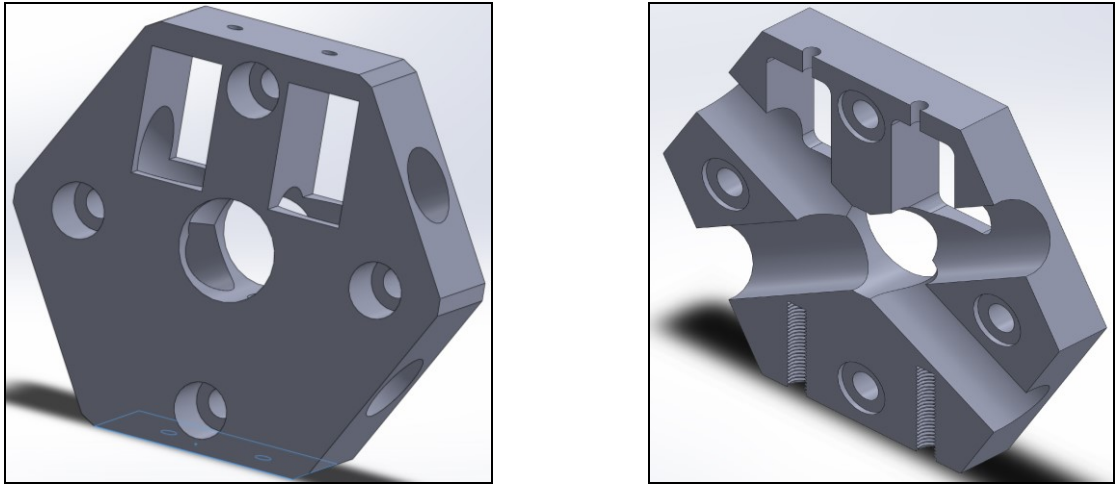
Tool Holder with provisions for mounting the end-effectors (left); cross-sectional view of the tool-holder
